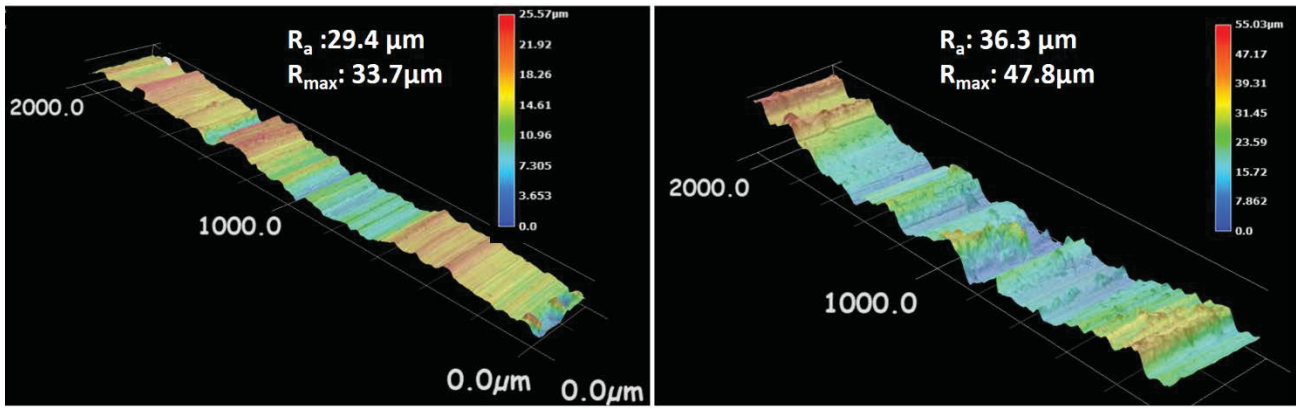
3D surface profiles form weld#1 (left) and weld #2 (right) obtained from high magnification optical means.
